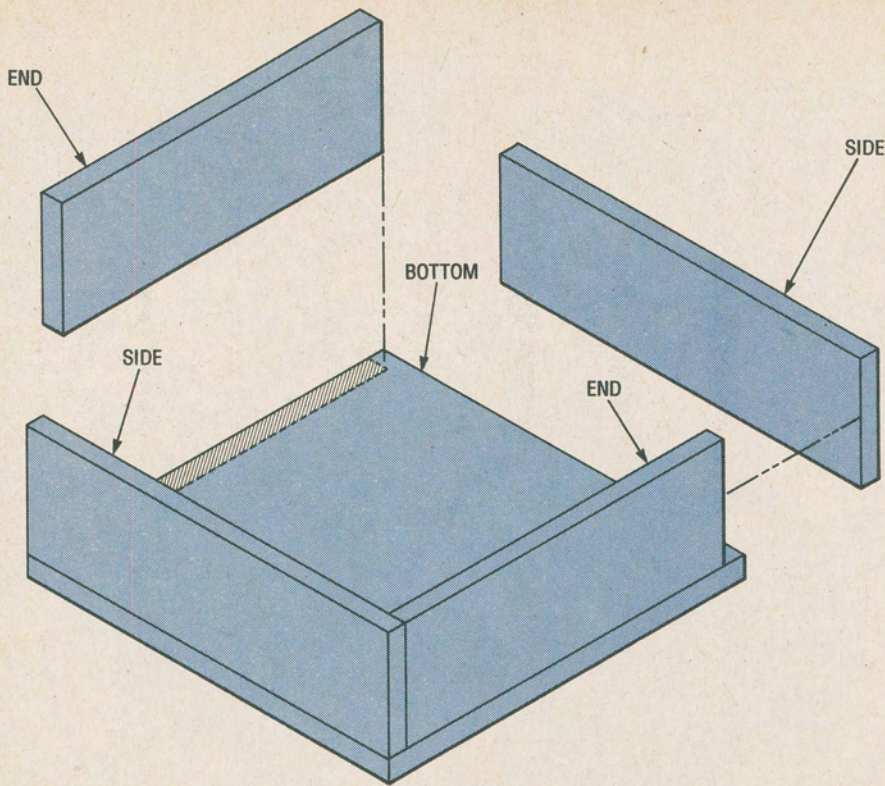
A simple enclosure consists of six parts: a removable top and a stationary bottom, two sides, and two ends.
